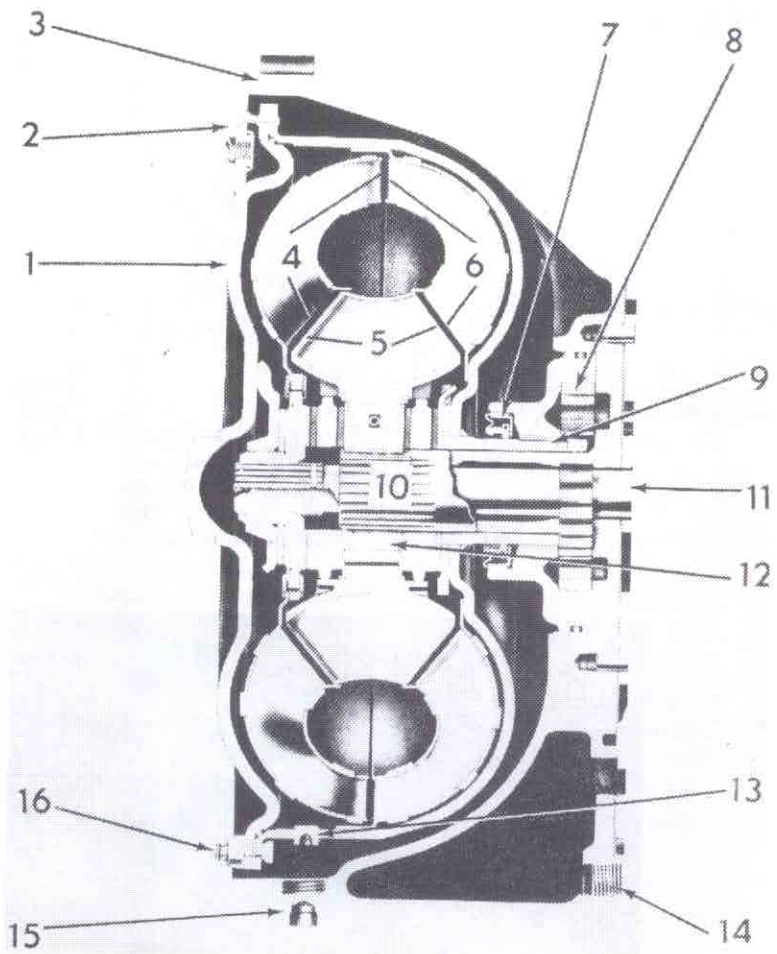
Cross sectional view—torque converter—starting with 1953 production
